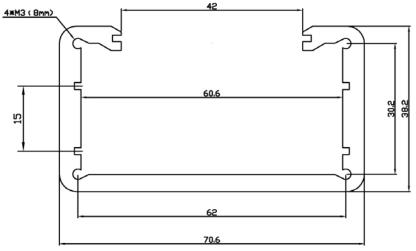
MECHANICAL DRAWING OF THE LEFT PANEL
